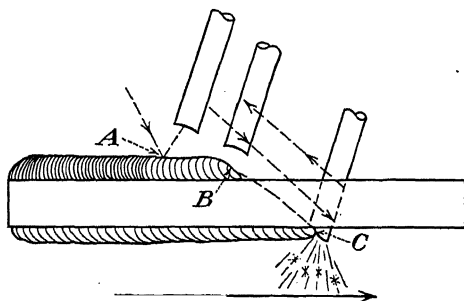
Restarting technique. Strike the arc at A, move forward through B and C, securing full penetration. Move the electrode back to B, and continue the weld.
